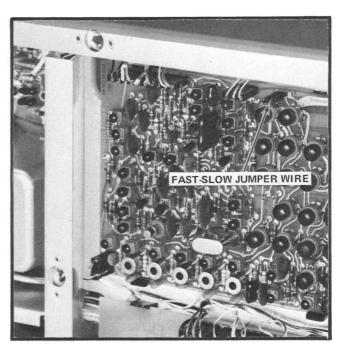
Line Timing board showing location of FAST-SLOW line sync lock jumper.
